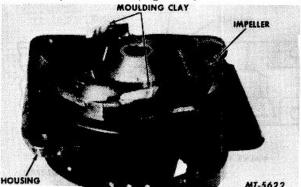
Moulding Clay Mounted on Impeller Vanes to Check Impeller Clearance
